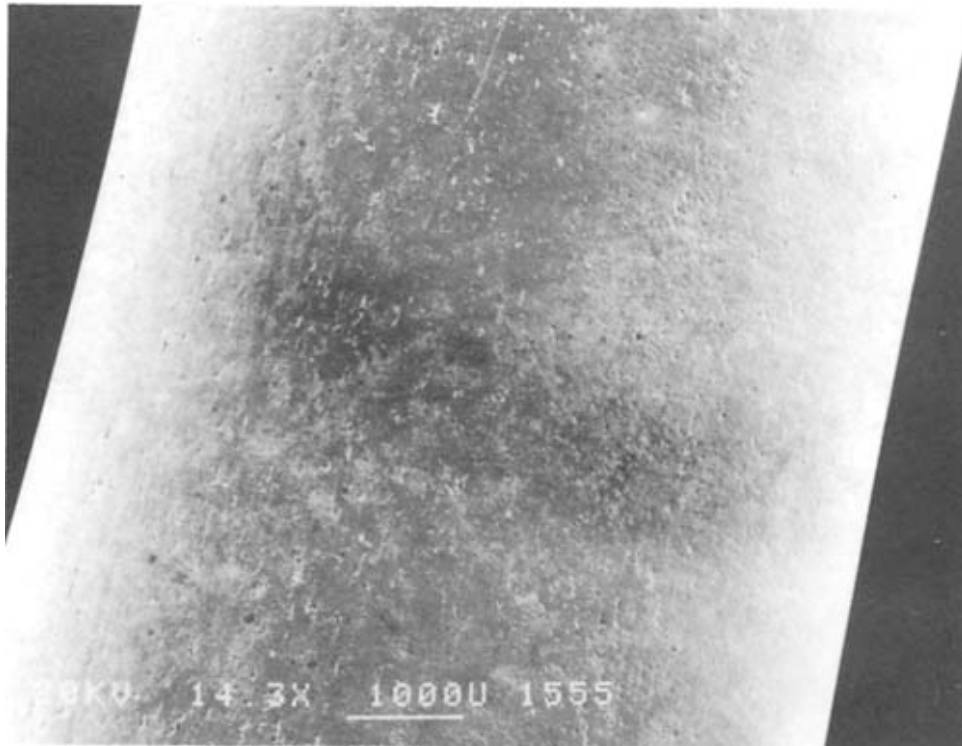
Surface of warm-formed rod in straight section (14.3X)
